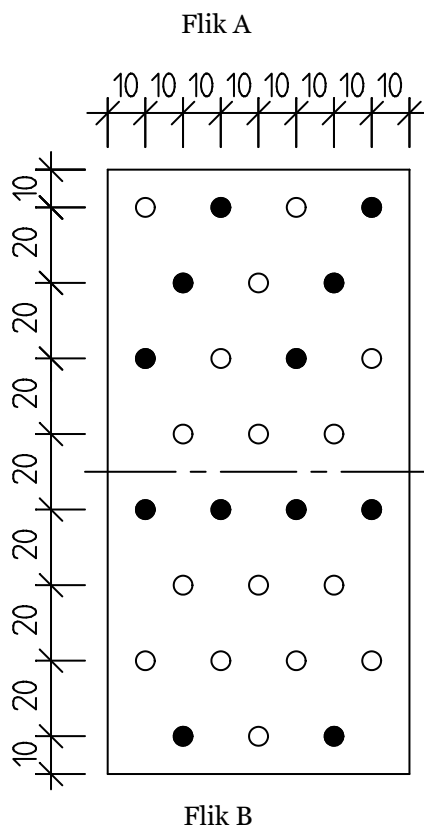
Dimensions of Angle Bracket type 1/80x80x2,0/2,5x80
